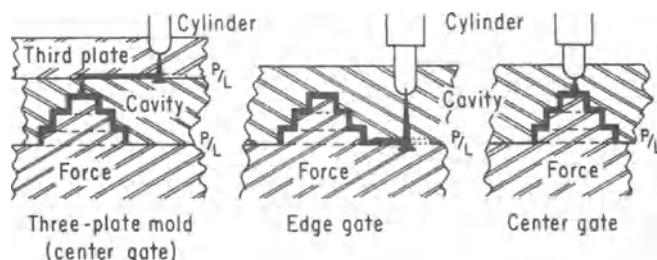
Injection molds are especially suitable for producing parts to meet different mold styles, as shown in these three examples.
